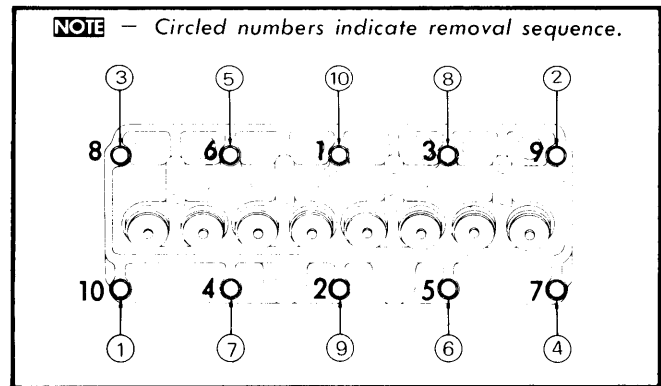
Tighten Cylinder Head in Sequence Shown (Remove in Reverse Order ① Through ⑩)
